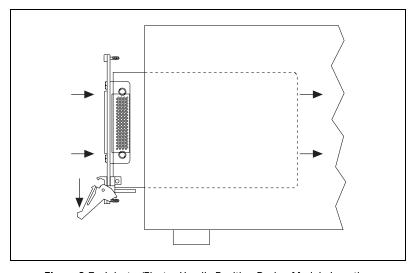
Injector/Ejector Handle Position During Module Insertion
